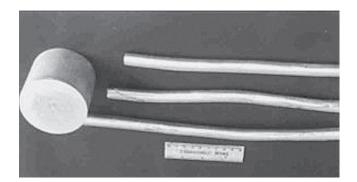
Compacted billet and extruded rods of AZ91 alloy
